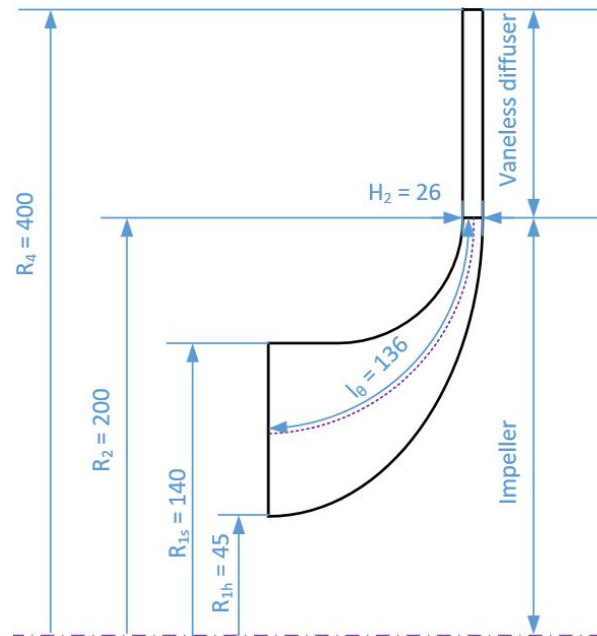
Meridional cross-section of the Eckardt-O impeller, dimension in mm [26]
